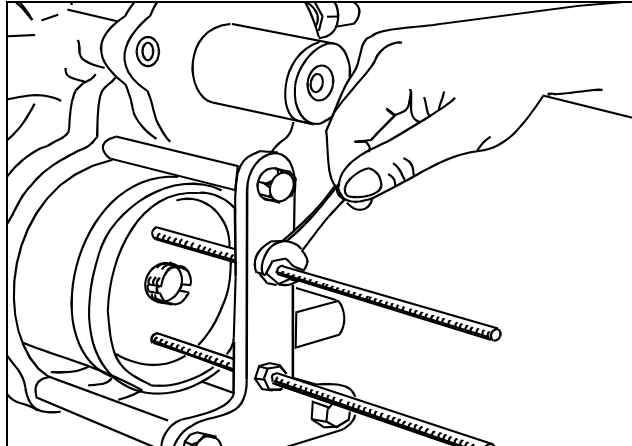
Removing the piston (101) or cylinder (108) and cylinder limitation (114) using removal device T2
